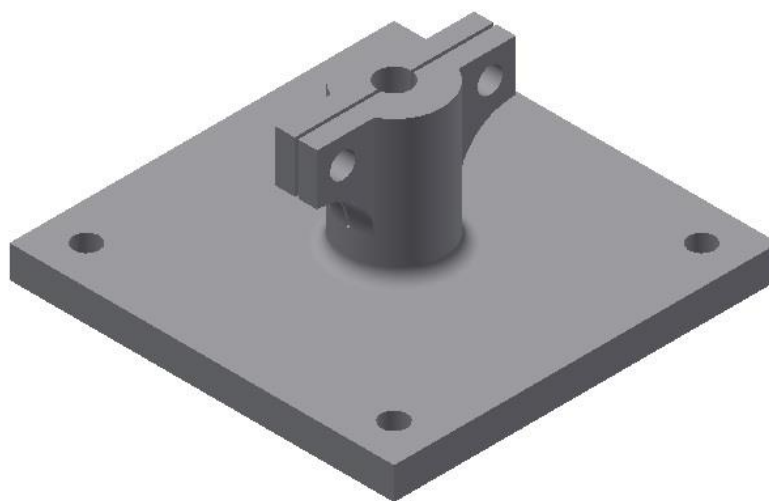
Autodesk Inventor drawing of part of detail for connection with stepper motor
